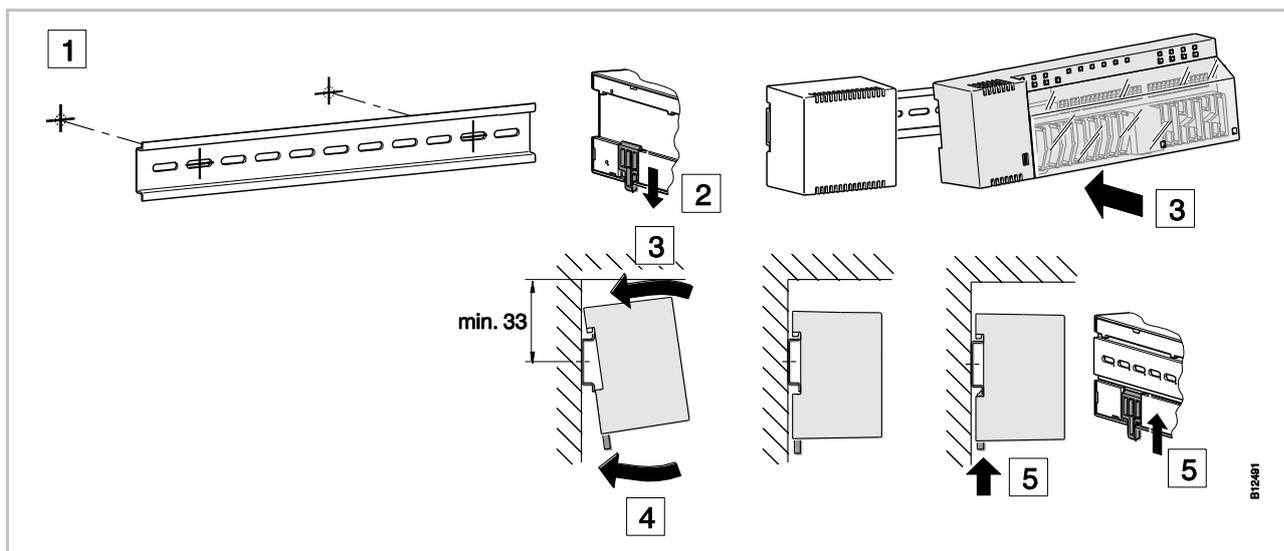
Mounting wireless connection module, here shown in the 24 V version with transformer
